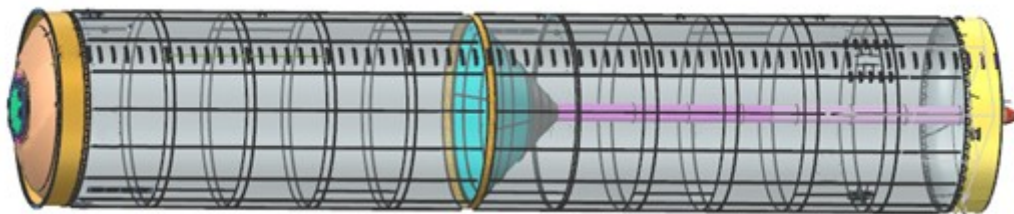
Draft Sketch of the Stainless-Steel Double Tank
